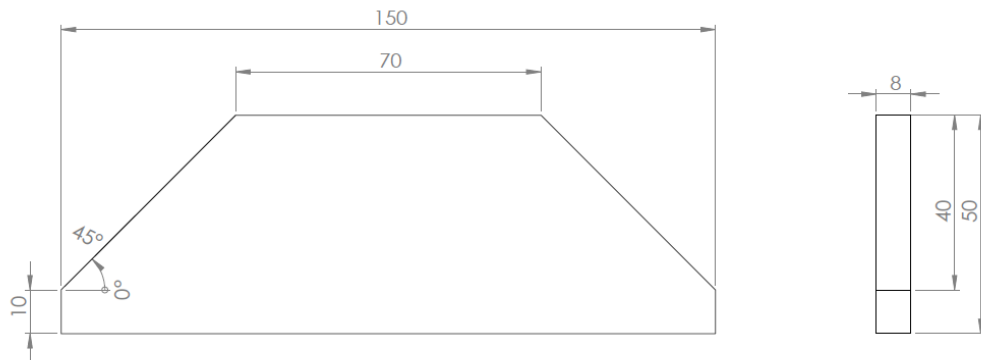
Shape and dimensions (in mm) of the gusset applied to all steel grades.
